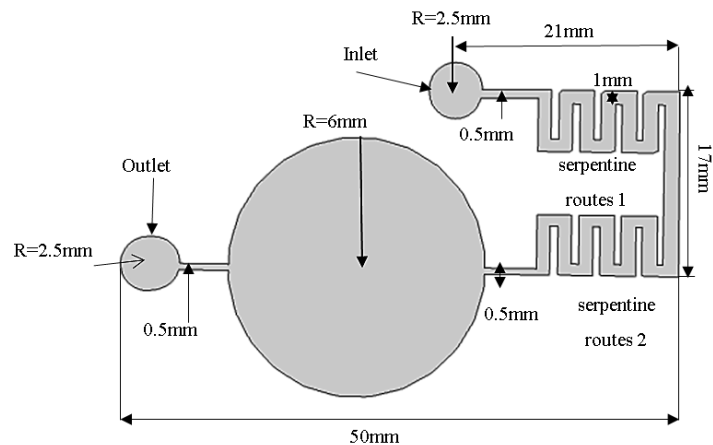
The dimensions of microfluidic device design in millimeter (mm)
